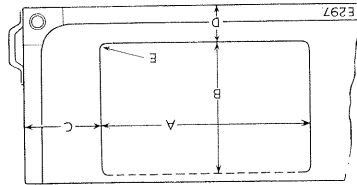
Position of cut-out in L.H. side wheel arch locker base—109 models
